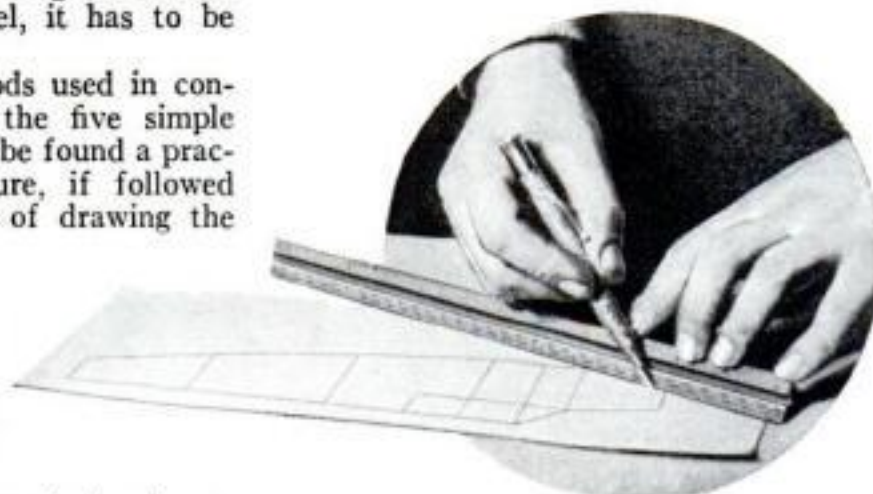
The first step in building a fuselage is to prepare an accurate, full size layout.
